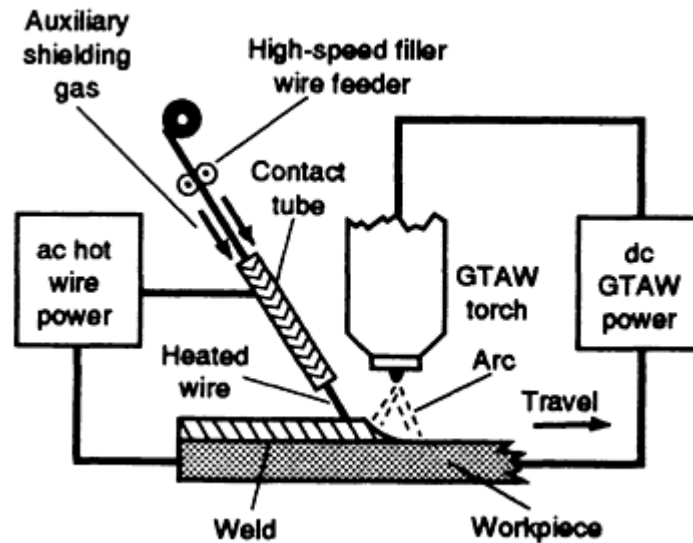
SCHEMATIC SHOWING KEY COMPONENTS AND PARAMETERS OF A GTAW HOT WIRE SYSTEM. SOURCE: REF 4
